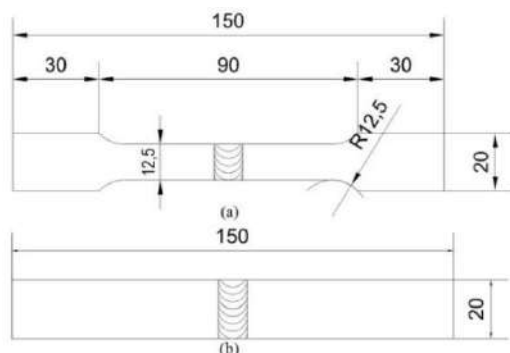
Tensile test specimen (a), Bending test specimen (b)
